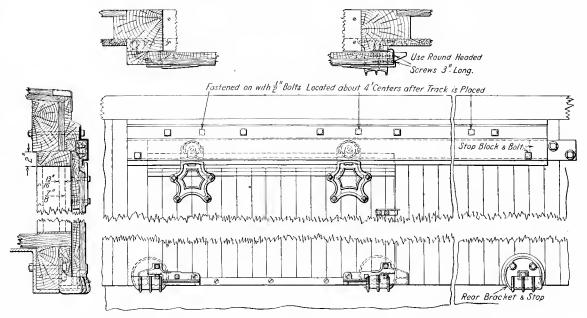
Chicago Car Door and Fixtures. Chicago Car Door Company.
